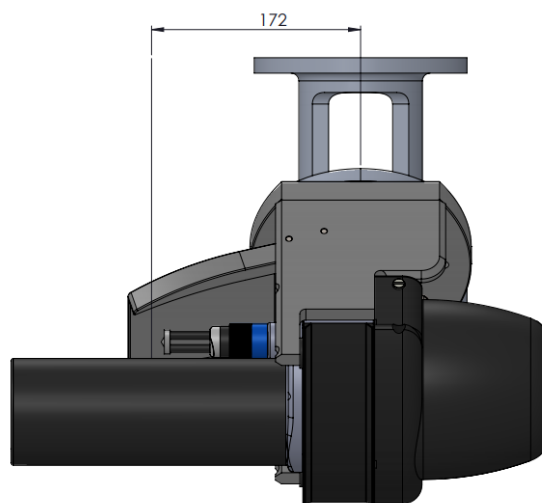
Side view of iWBMS/iWBMSH (1° TX) in the standard dual head bracket with dimensions to center of flange.
